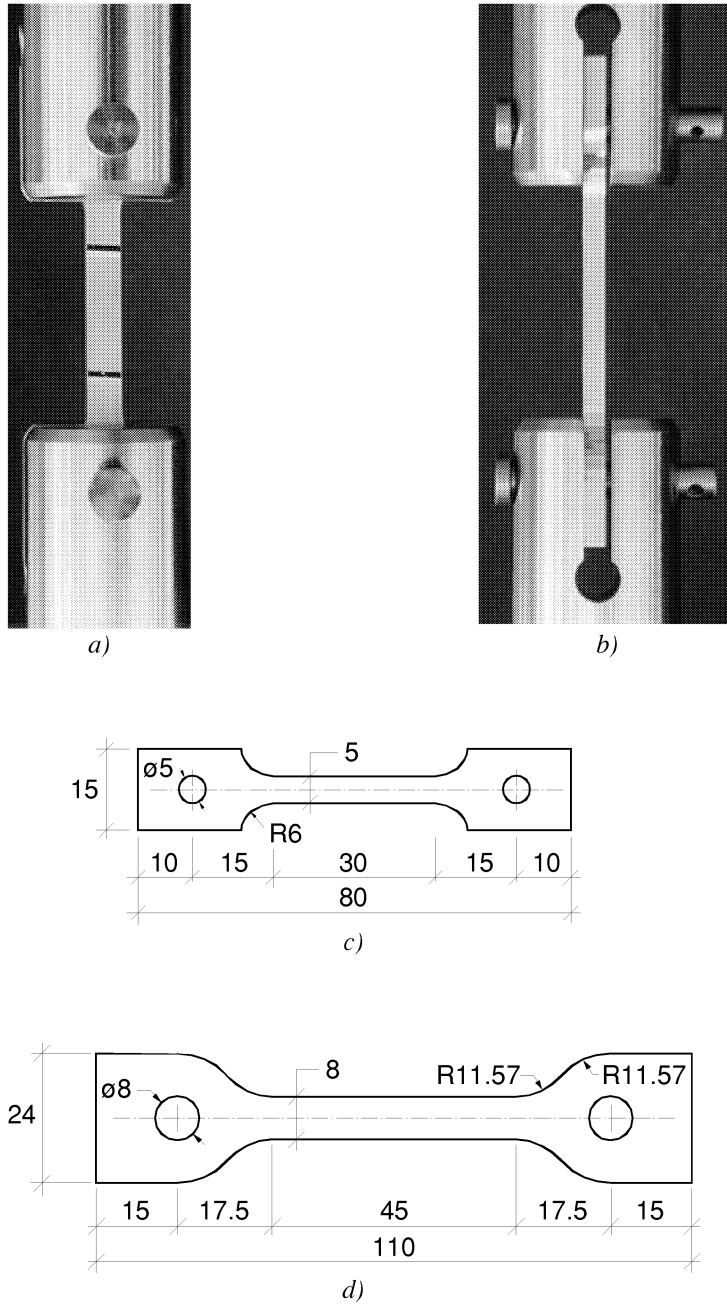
Uniaxial test specimens: a) front view, b) side view, c) geometry of the 80 mm long specimens, and d) geometry of the 110 mm long specimens.
